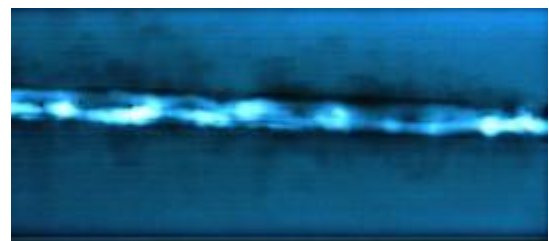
Example of scanned radiographic film with incomplete penetration of weld joint (HP SCANJET 5500 c)
